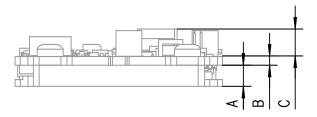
BR\_XETK-S2.0 Dimensions - Side View
